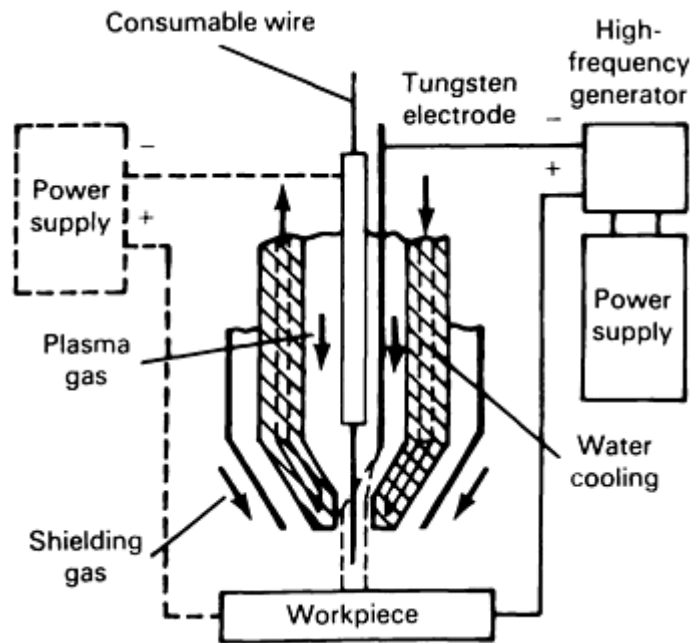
SCHEMATIC OF PLASMA-MIG WELDING EQUIPMENT. SOURCE: REF 1
